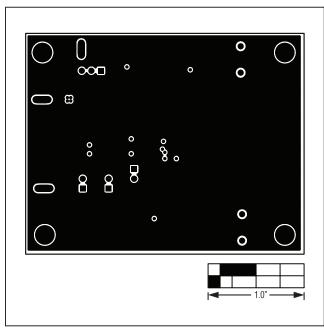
MAX14532E EV Kit PCB Layout—Inner Layer 2
